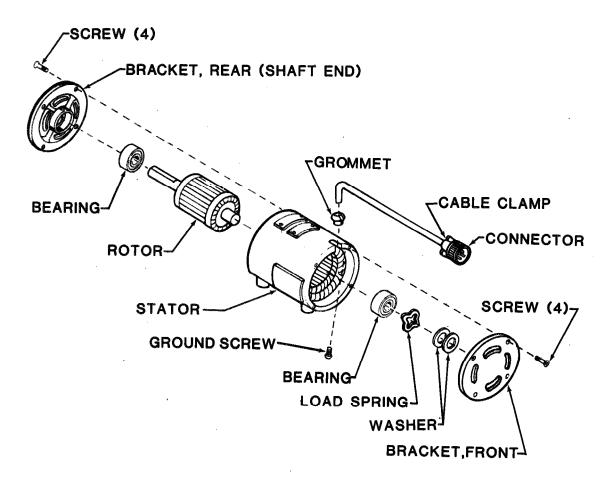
Motor Assembly, Welco Model M-4720-50
